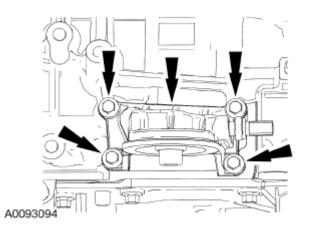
Locating Bolts And Oil Filter Adapter Courtesy of FORD MOTOR CO.
